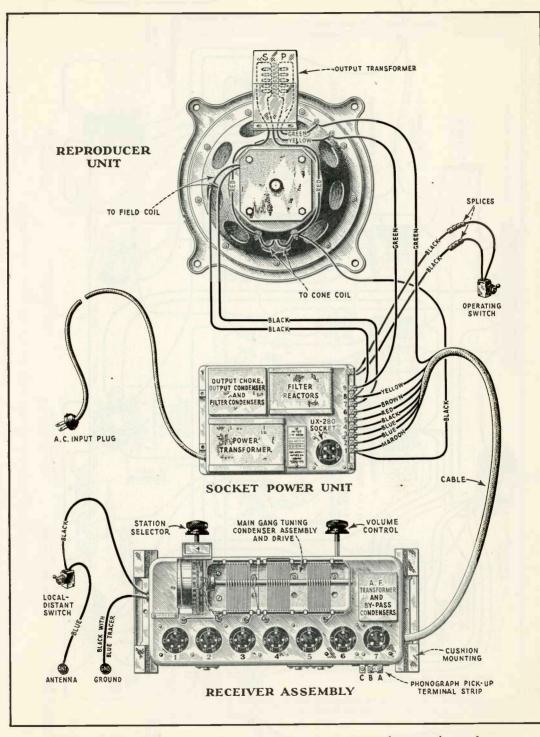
Cable connections, socket contacts, reproducer unit, socket power unit and receiver assembly
